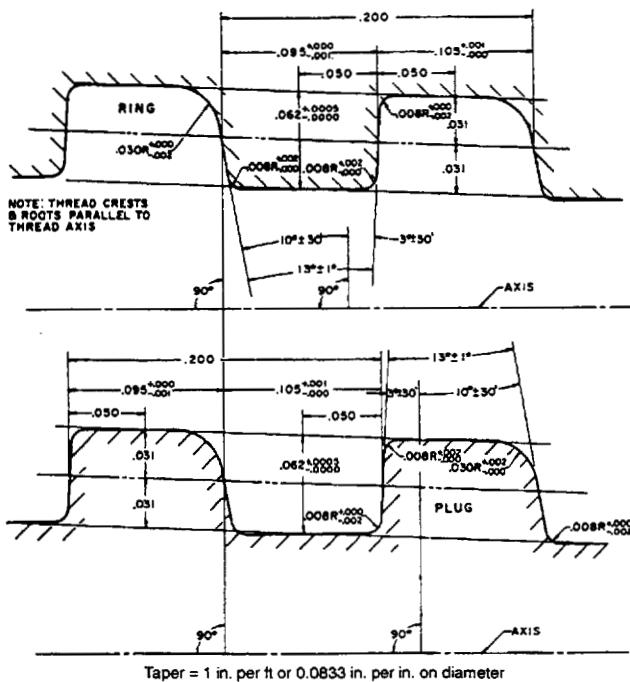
Gauge Thread Form and Dimensions for Buttress Casing (Sizes 16 and larger)
